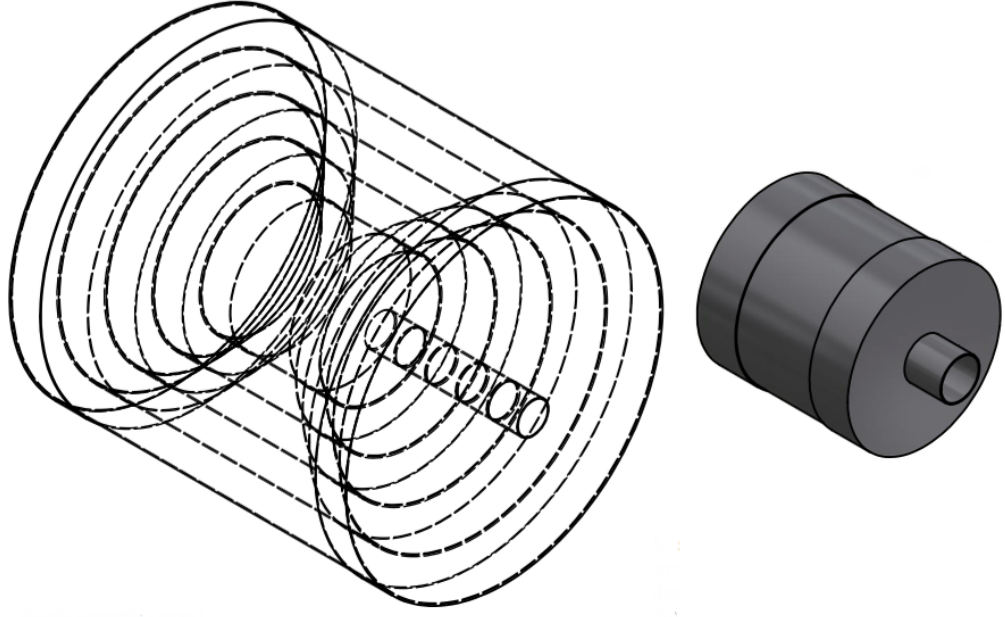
CAD drawings of the proposed passive shielding design for this experiment. The overall shielding system comprises several shield bodies with end caps (left) which are nested concentrically (right). This shielding design provides an extremely high shielding factor both radially and axially in simulations and is thus expected to be suitable for ultralow magnetic field experiments with ultracold atoms.
